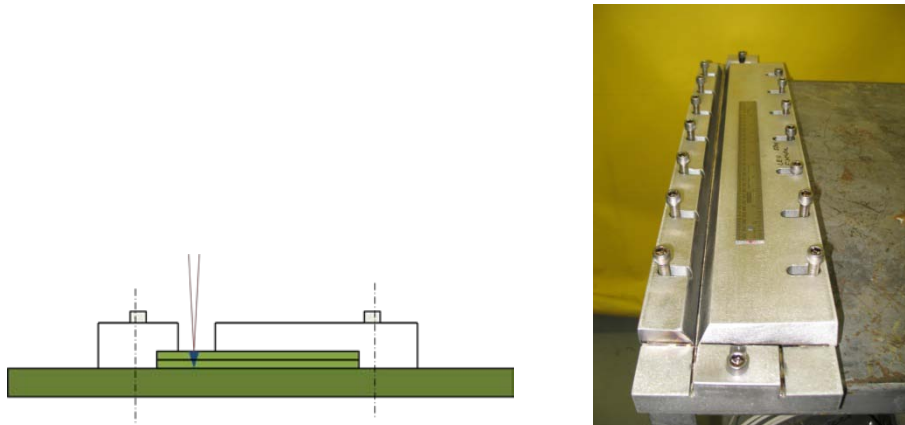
Modified EBW fixture providing clamping on both sides of the beam path.
